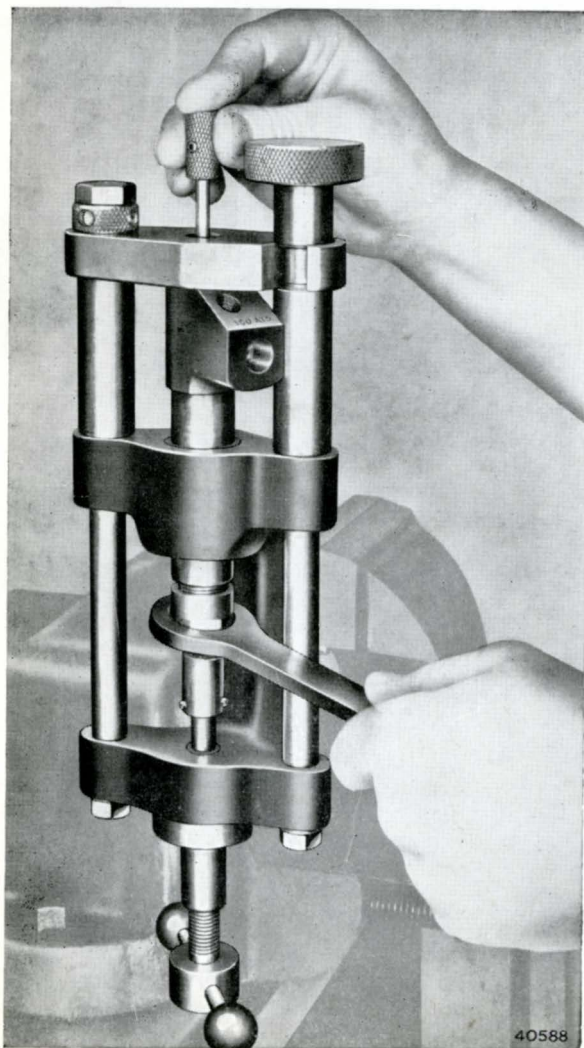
TIGHTENING THE NOZZLE CLAMP NUT
